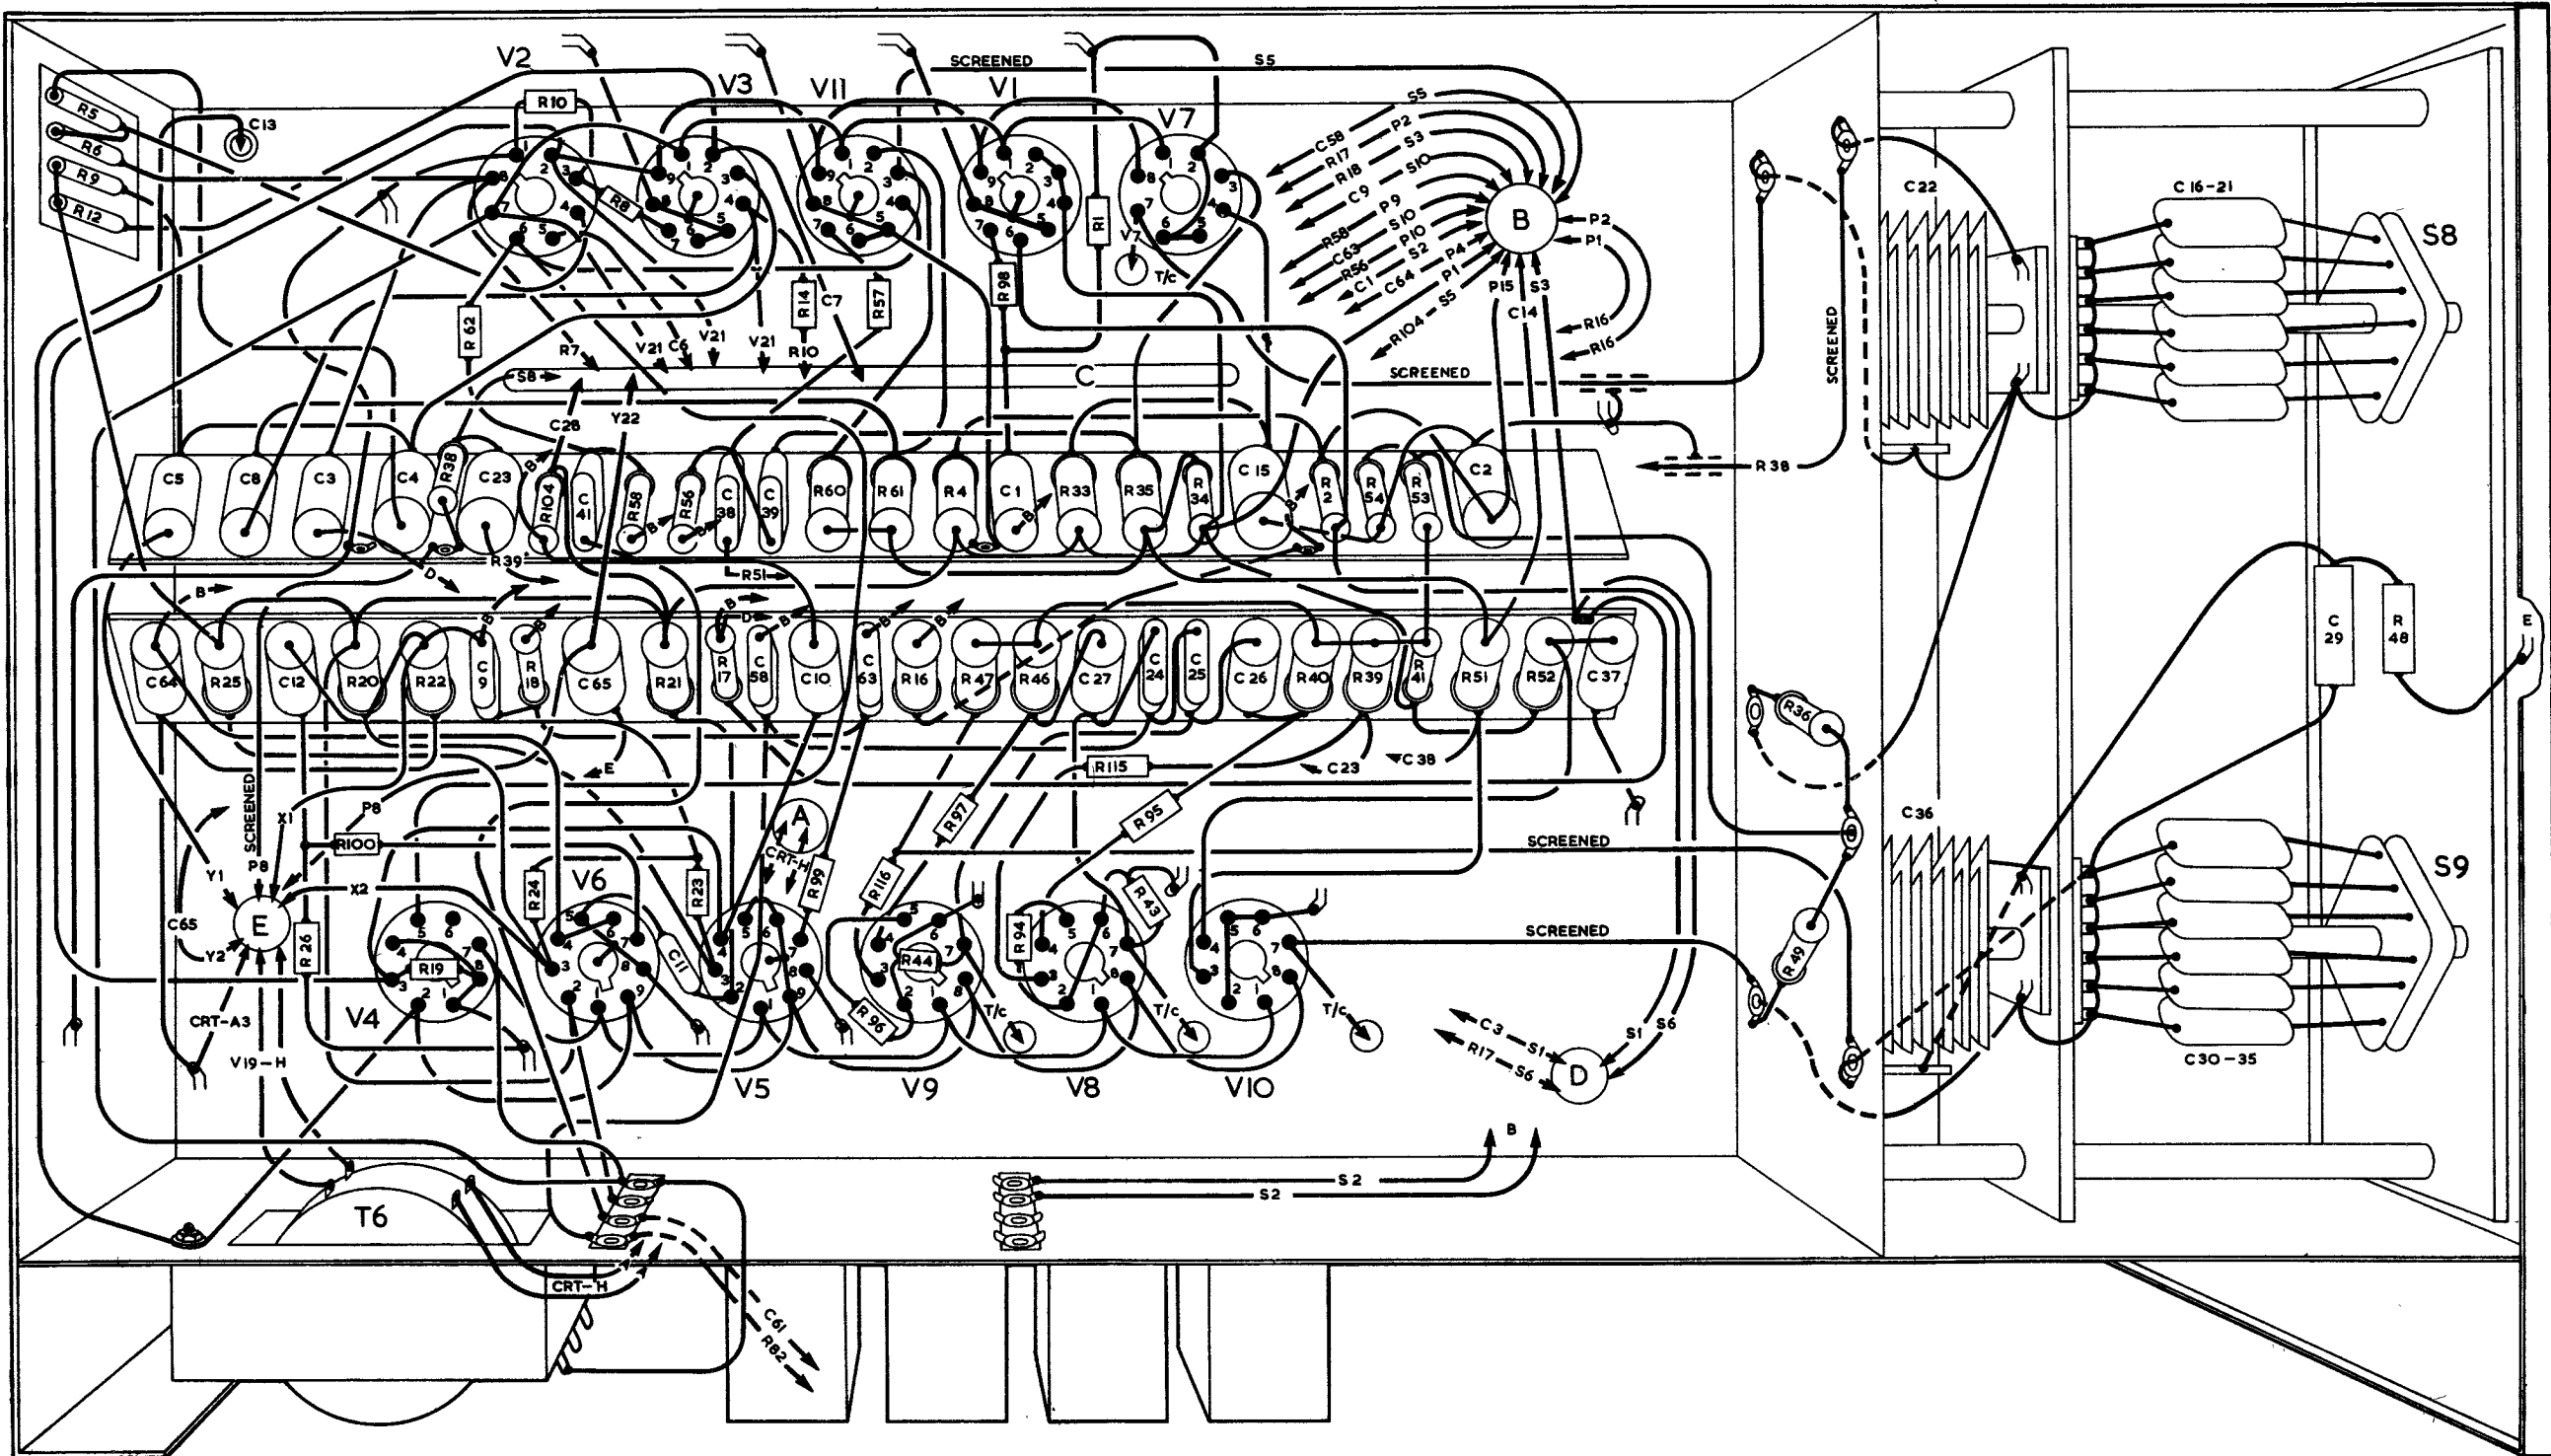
BENCH WIRING OF INDICATING UNIT TYPE 62A — UNDERSIDE OF CHASSIS
